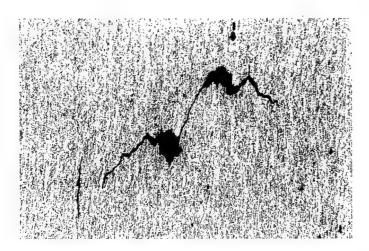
Void formation and longitudinal splitting within the neck of a plain tensile specimen of Q1N steel tested at  $-98^{\circ}$ C. Specimen testing was stopped just prior to failure. (x75)
